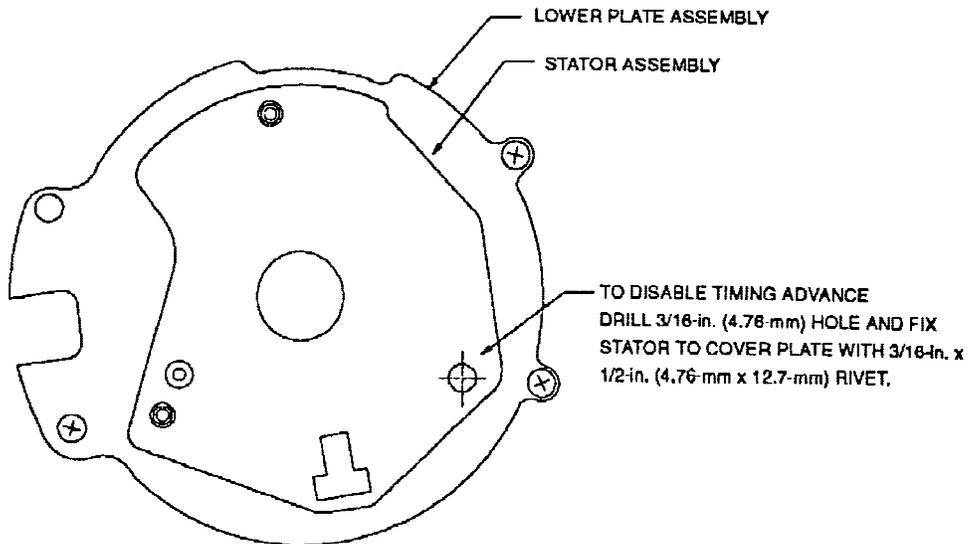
Modified Ford Distributor—Stator Assembly
